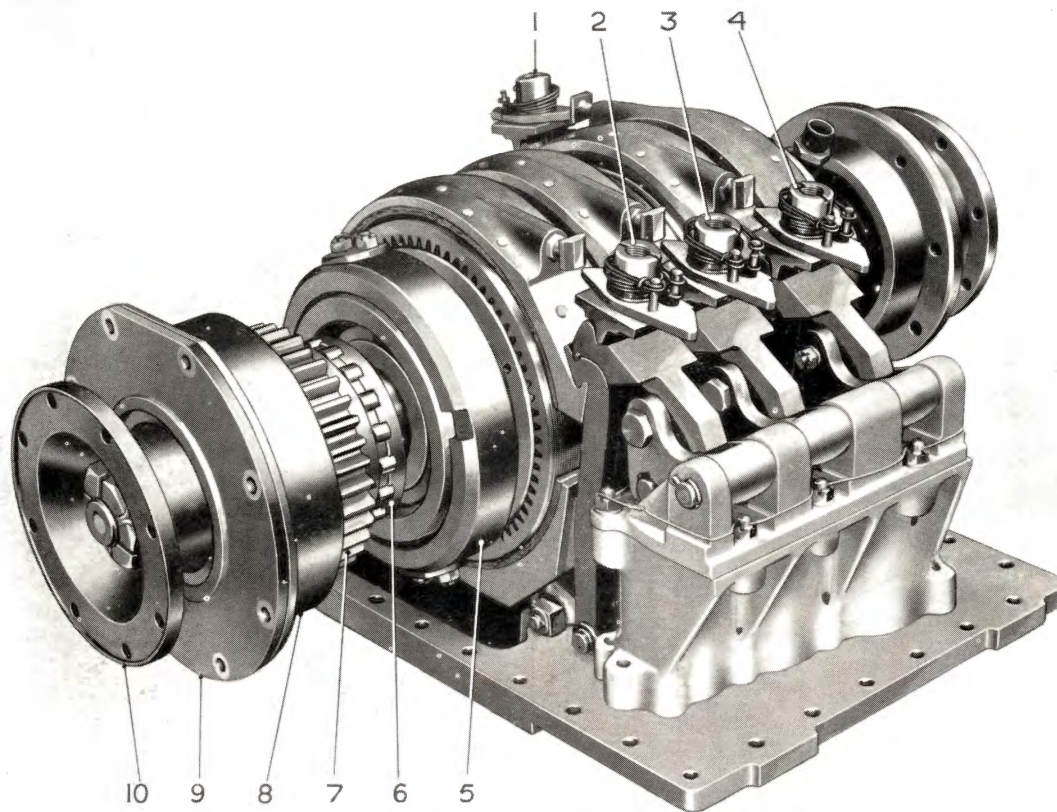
FITTING GEAR CASE TO RUNNING GEAR
